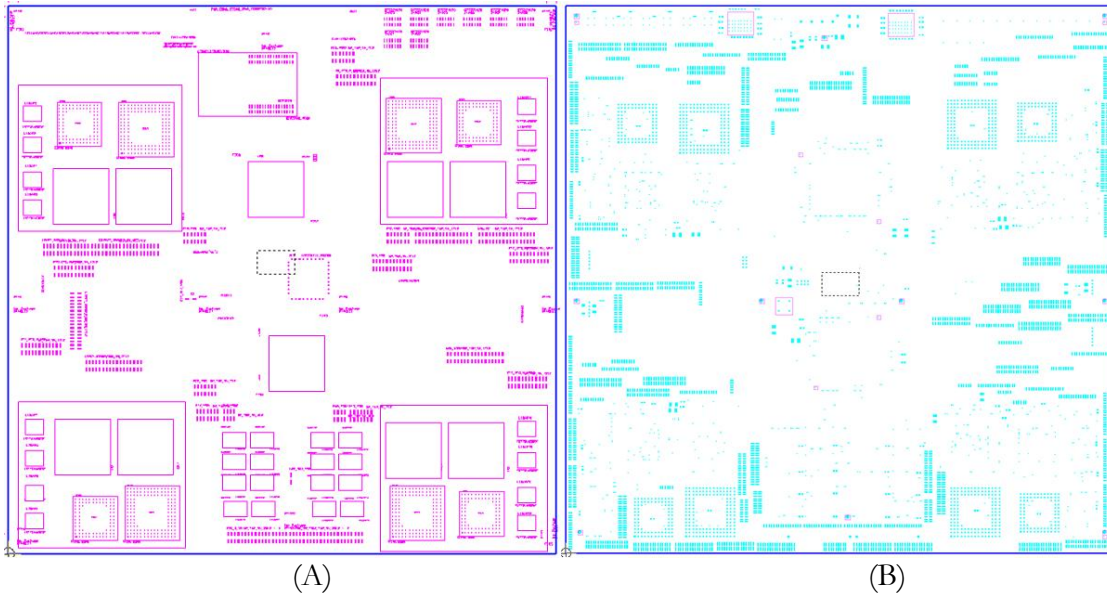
FAST PCB layout showing the (A) top and (B) bottom layers using inverted colors.
